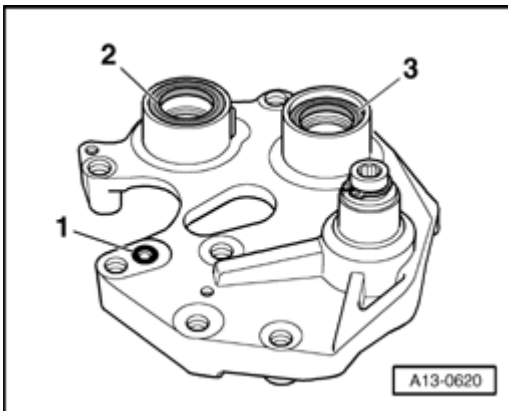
Driving Out Sealing Rings (For A/C Compressor Drive) And (For Power-Steering Pump Drive) Using Drift
